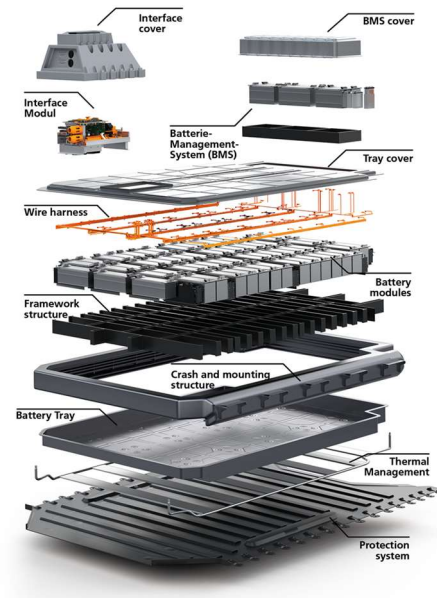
Exploded drawing of a battery pack demonstrator (TRUMPF Laser- und Systemtechnik GmbH, 2021)
